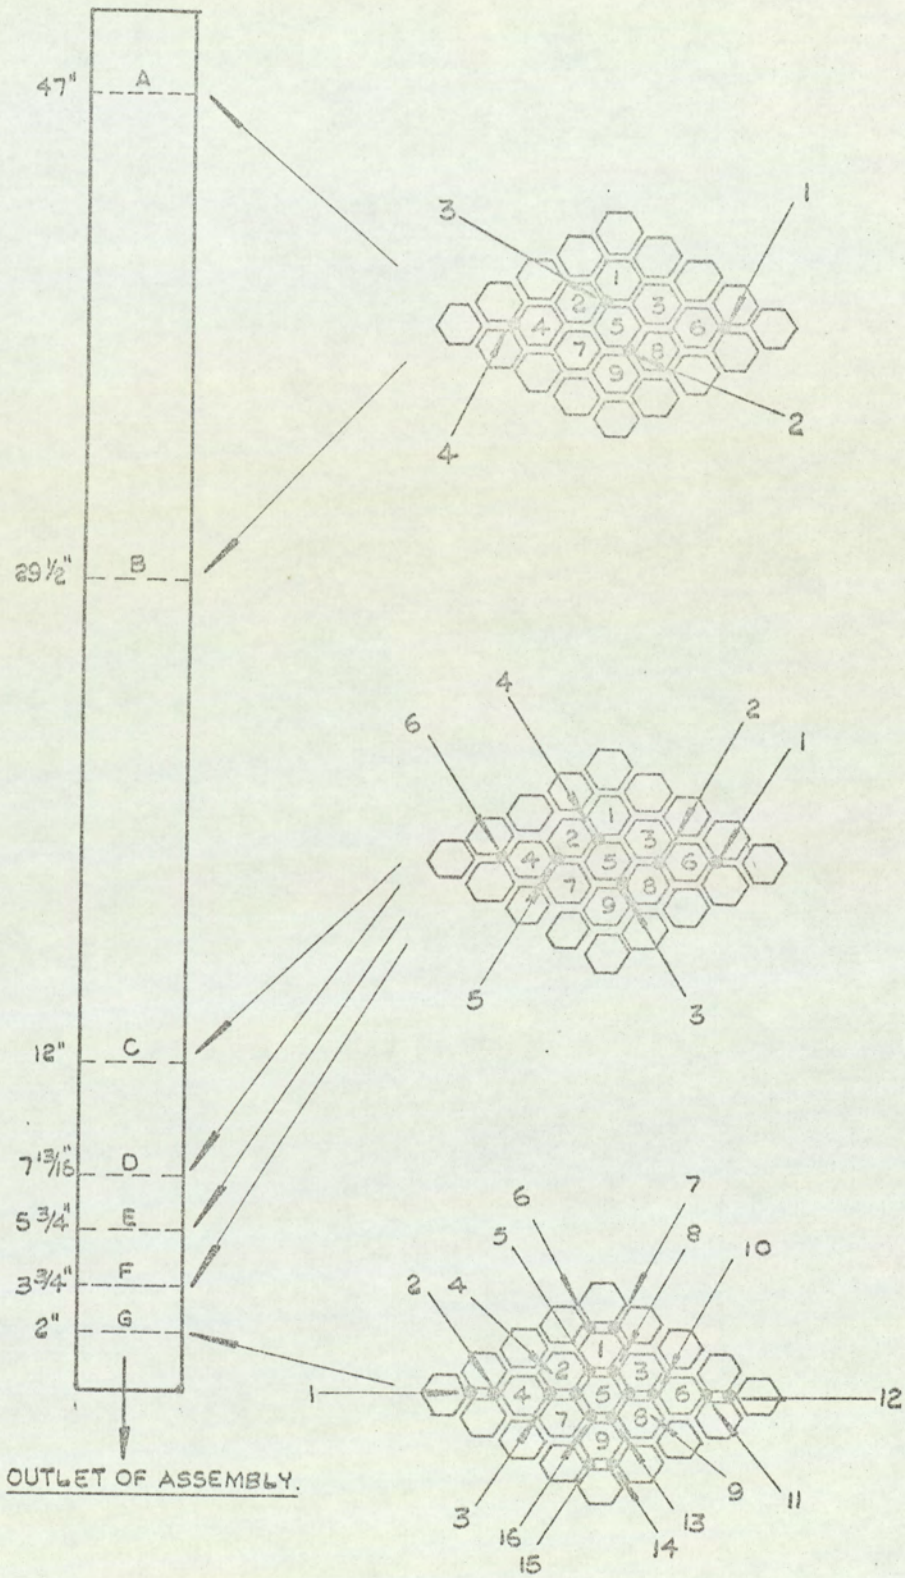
ARRANGEMENT OF 9-PIN SUB-ASSEMBLY WRAPPER CHANNEL THERMOCOUPLES.
